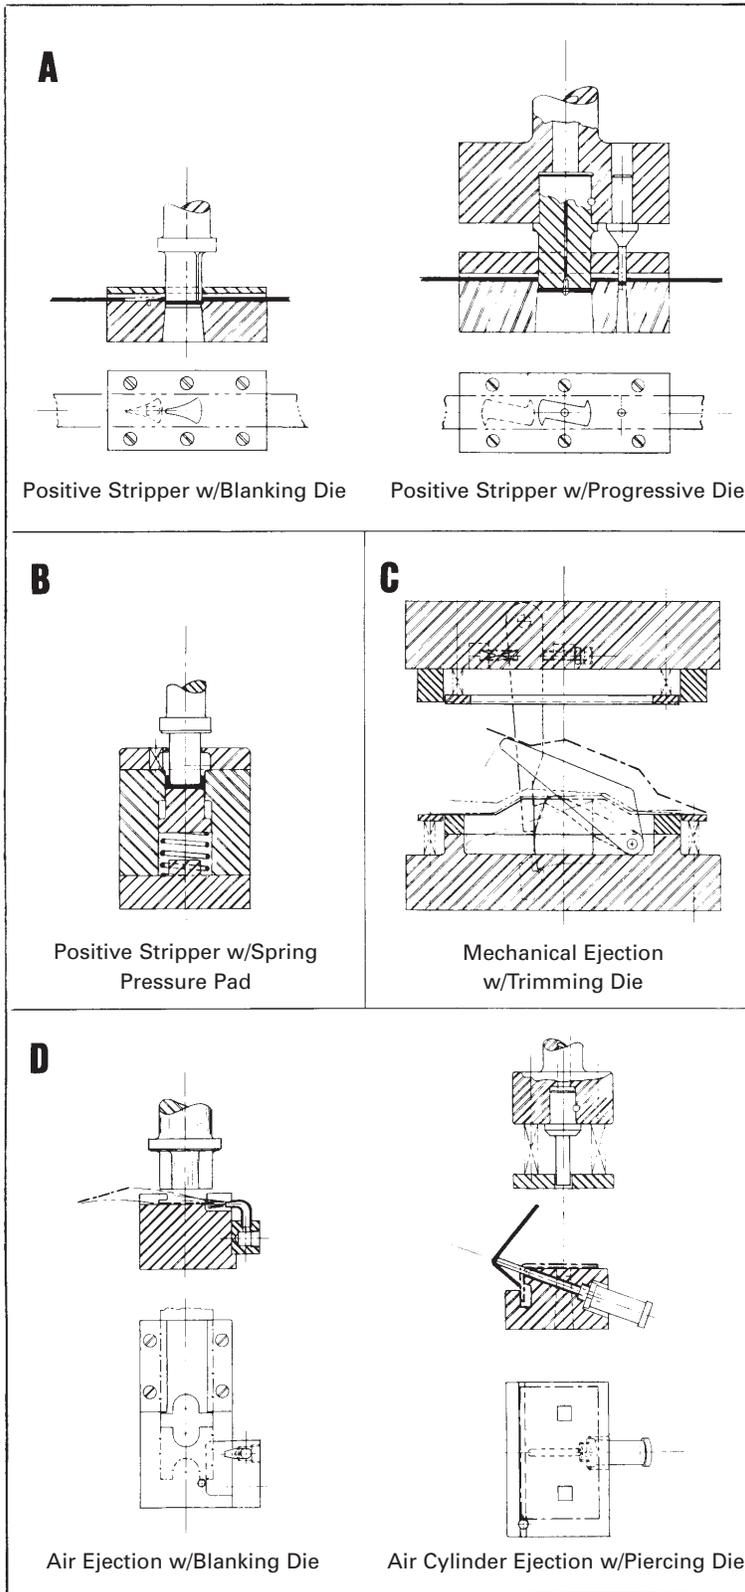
This illustrates mechanical methods for stripping finished pieces from power press dies.
